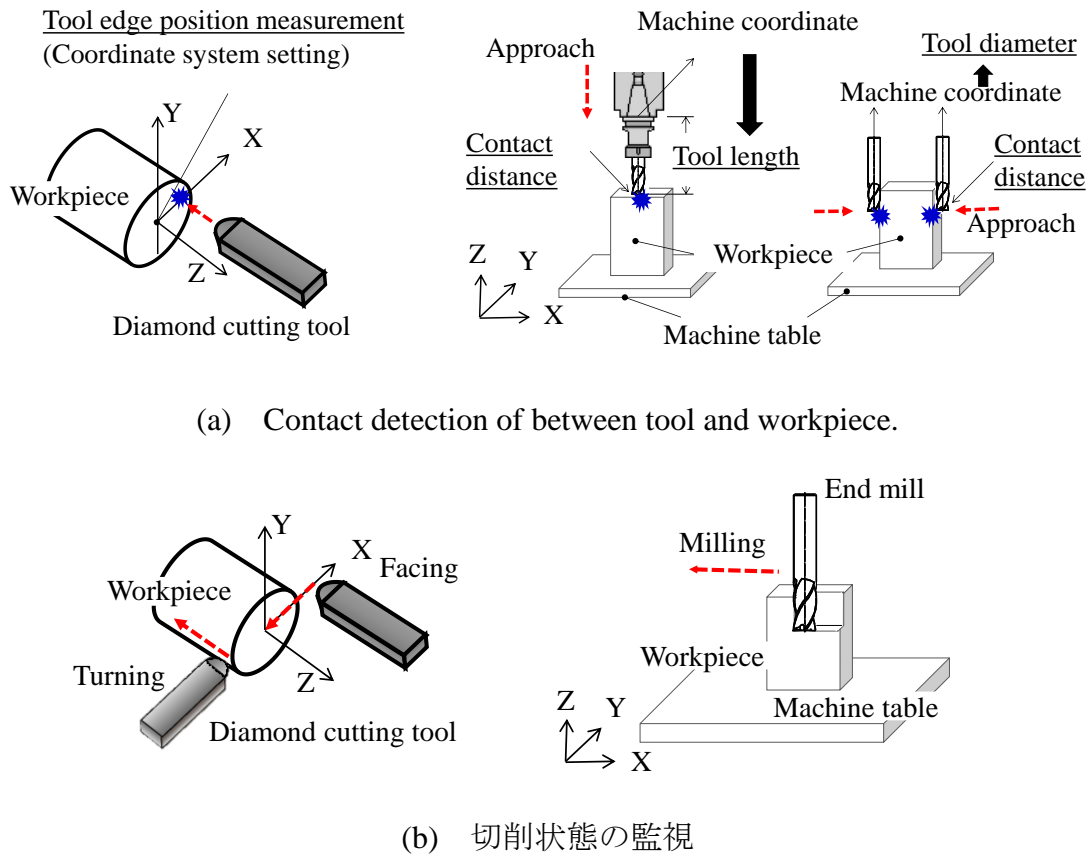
Schematic of cutting edge position measurement and cutting process monitoring.
